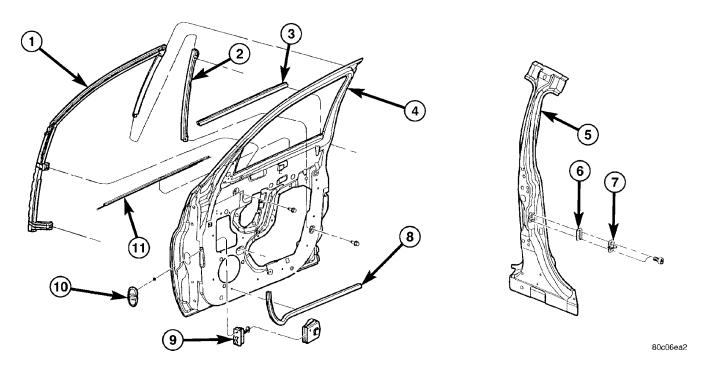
FRONT DOOR WEATHERSTRIP AND LATCH STRIKER
